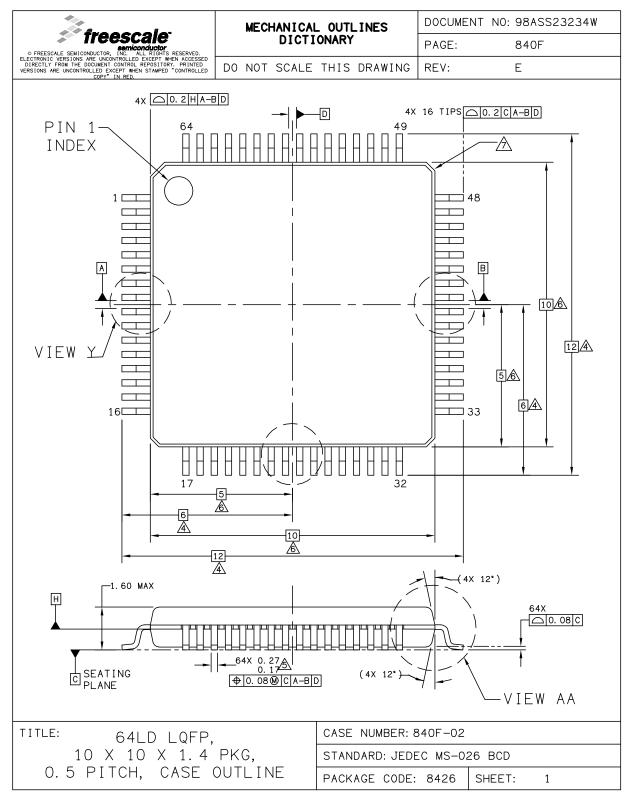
64 LQFP mechanical drawing (part 1 of 3)
